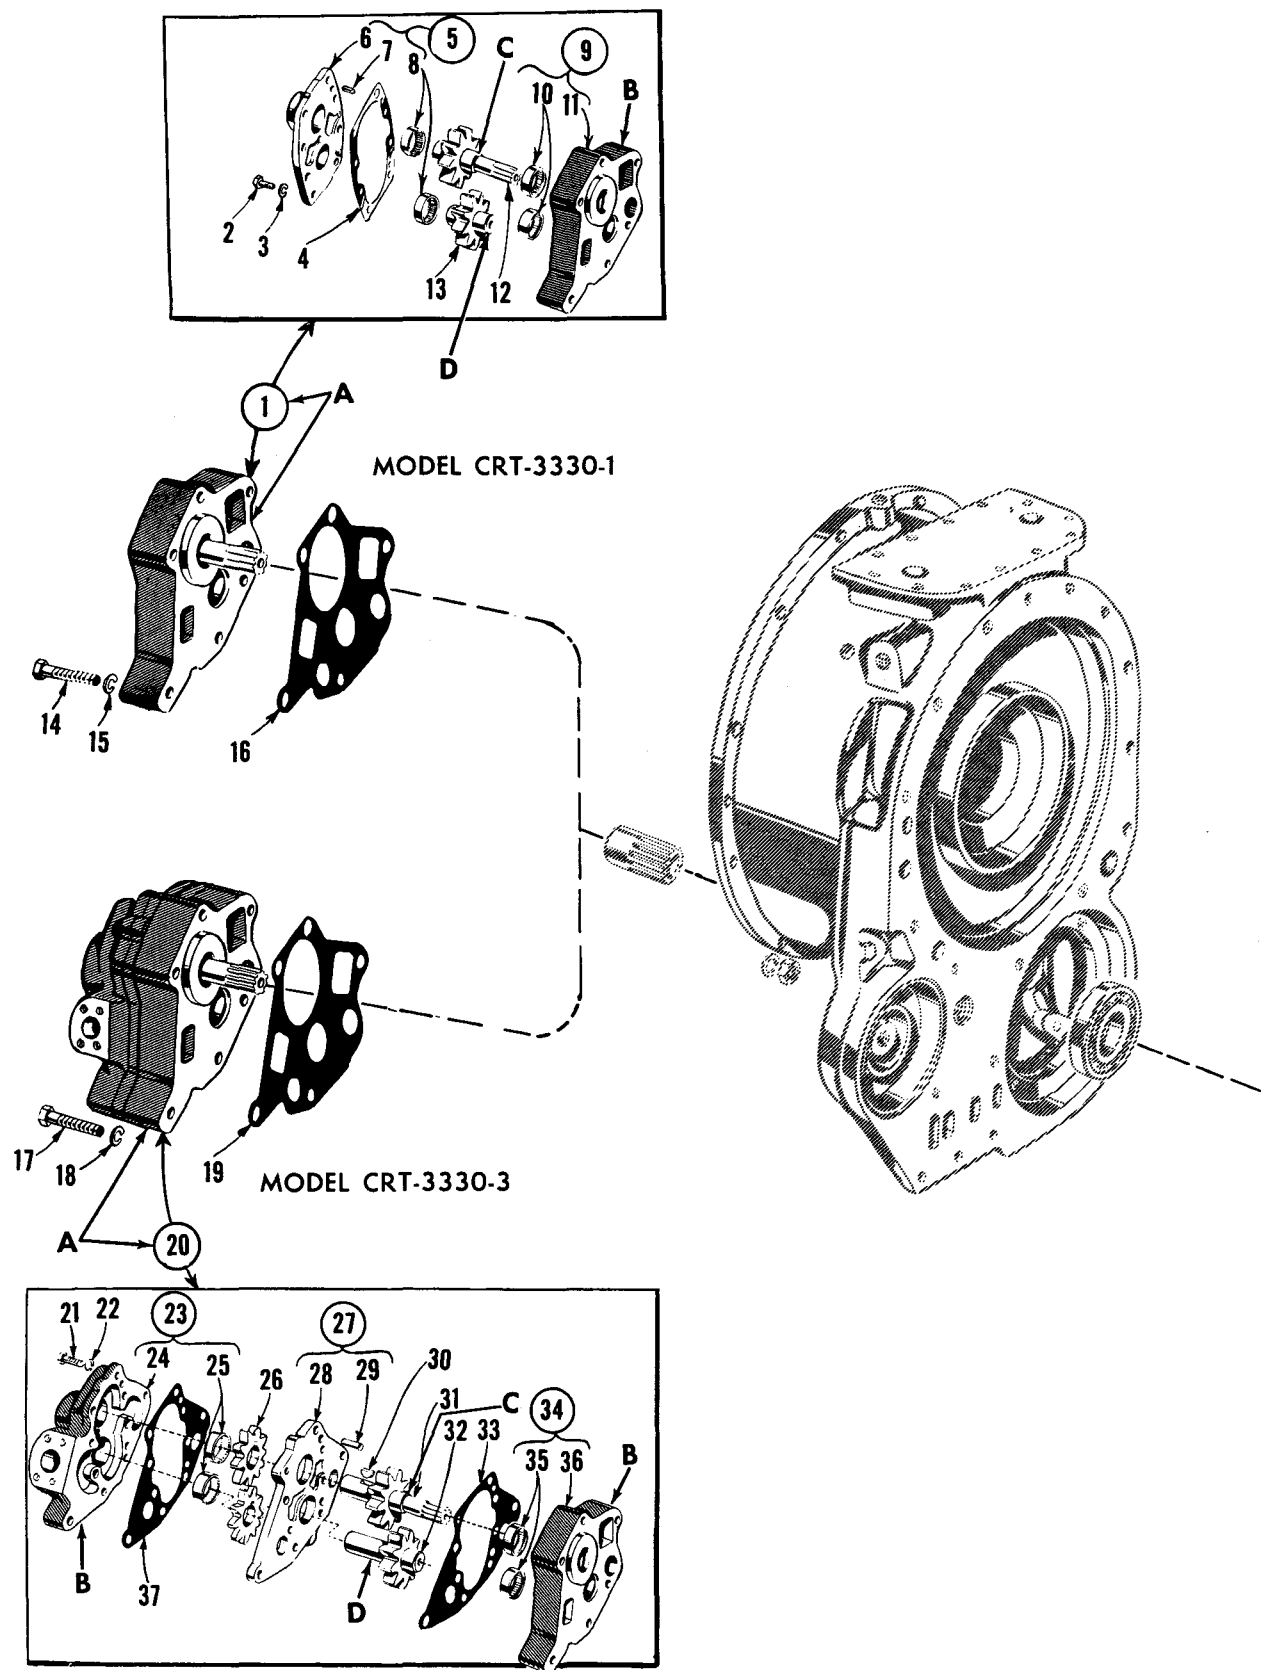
Input pressure and scavenge oil pump assembly and input driven charging oil pump assembly, exploded view
